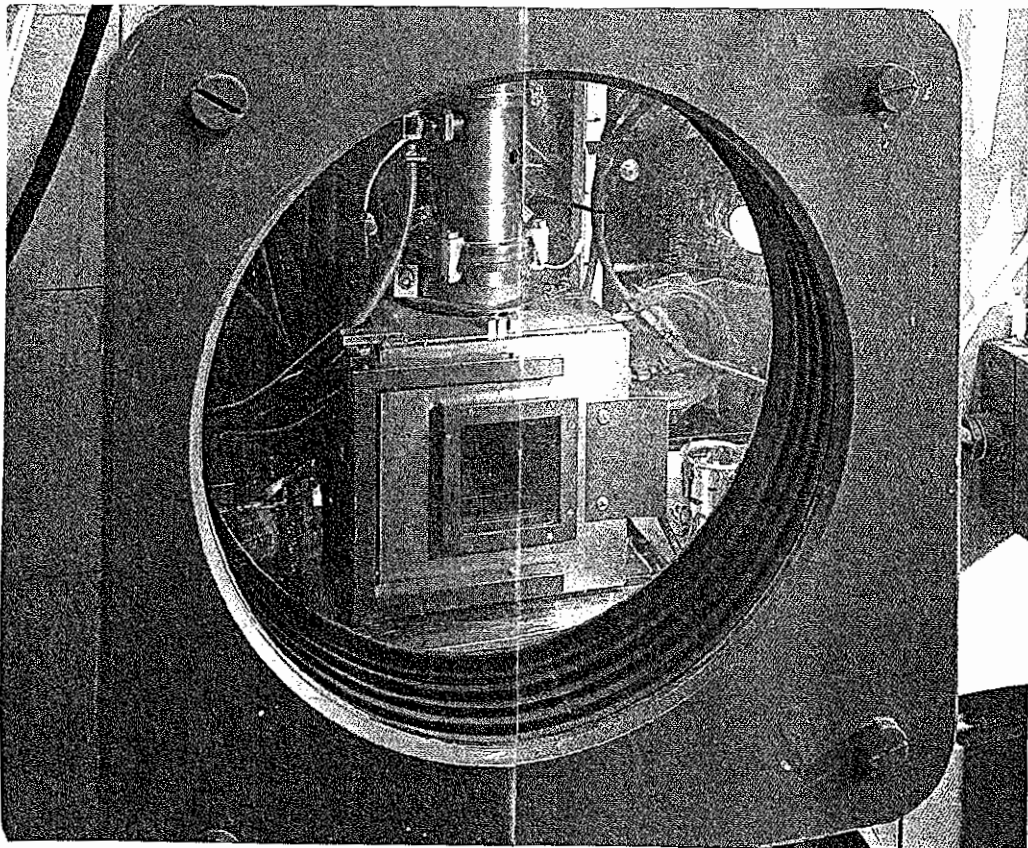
Electron-beam welding used for reconstitution of specimens from irradiated materials
